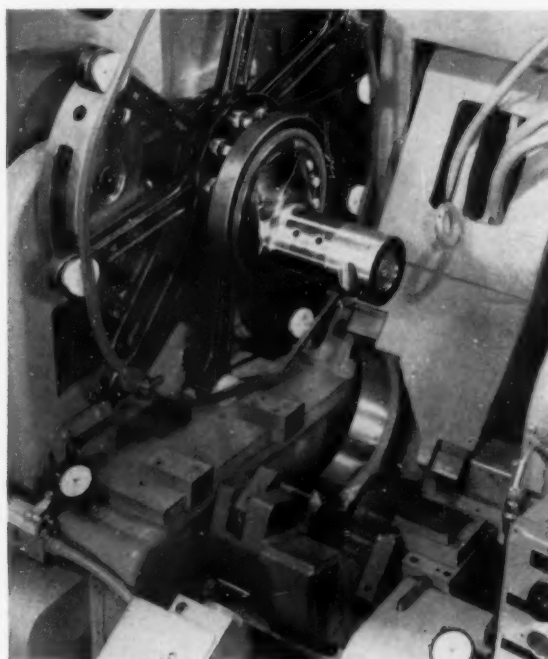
After operations shown in *Fig. 5* are completed, the center head is opened to allow assembly of center crankcase and other rod assembly.
